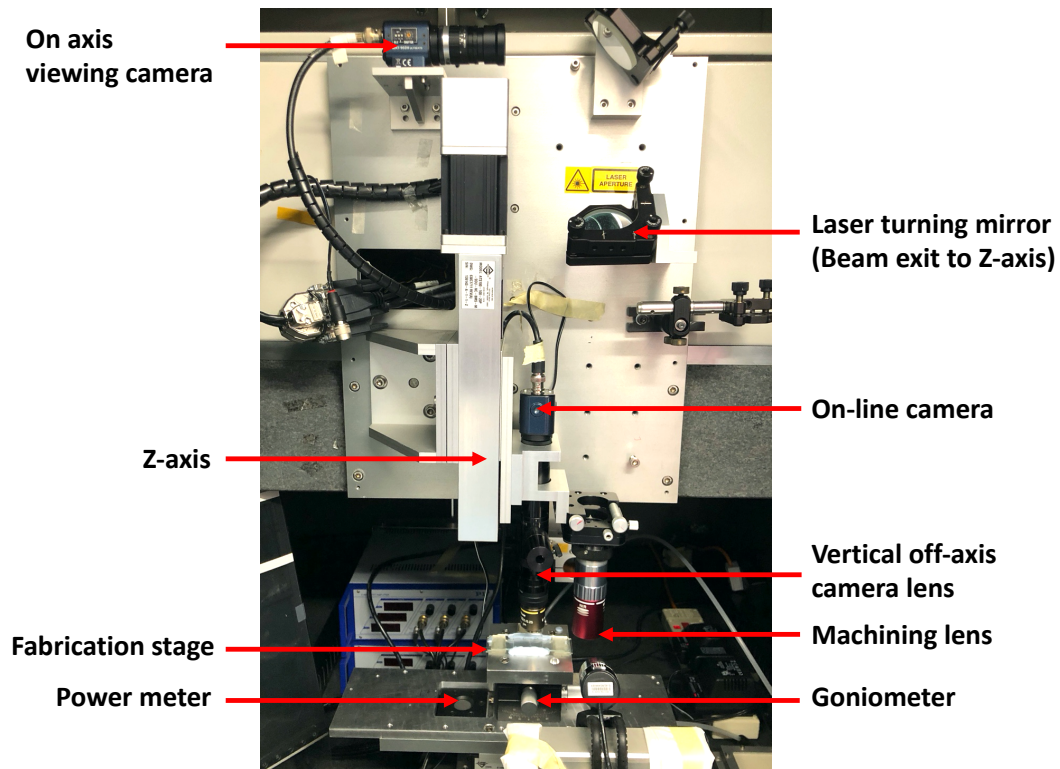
Laser system Z-axis setup including Z-stage opto-mechanical layout includes viewing and machining camera.
